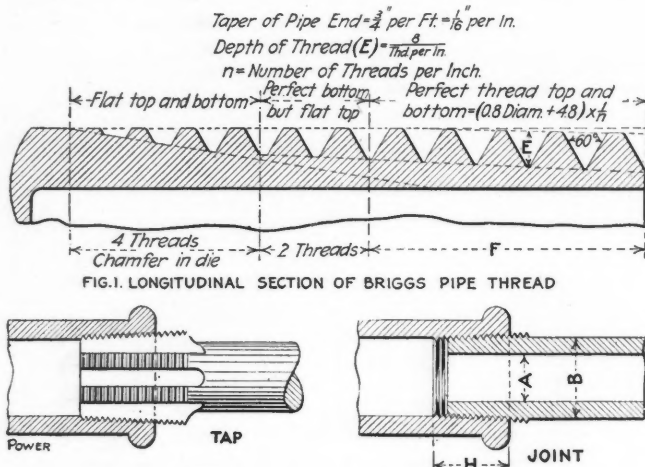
LONGITUDINAL SECTION OF BRIGGS PIPE THREAD
